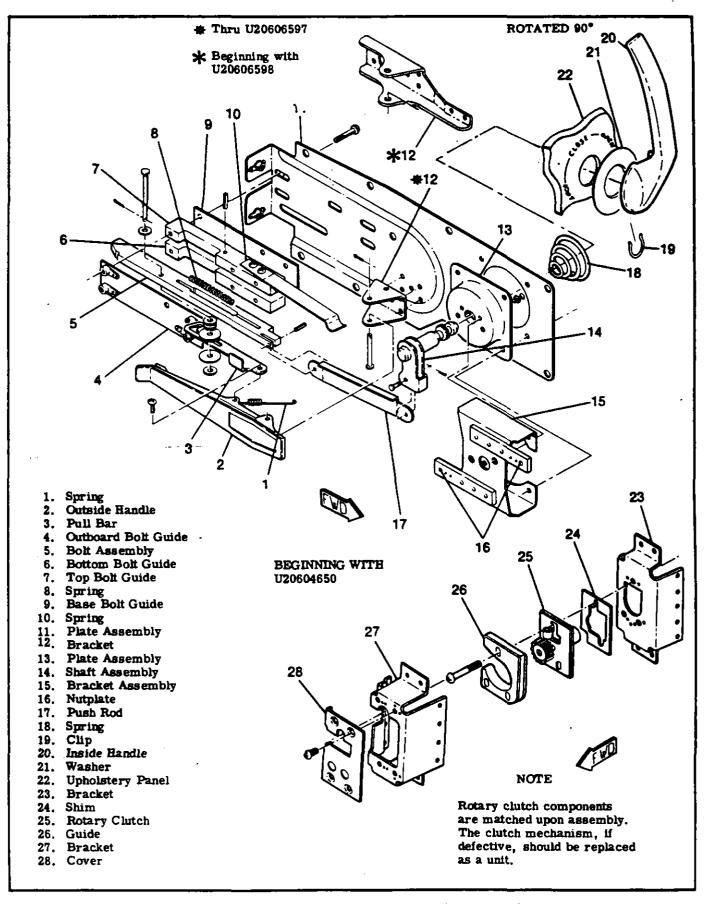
Cargo Door Latch Installation (Sheet 2 of 2)
